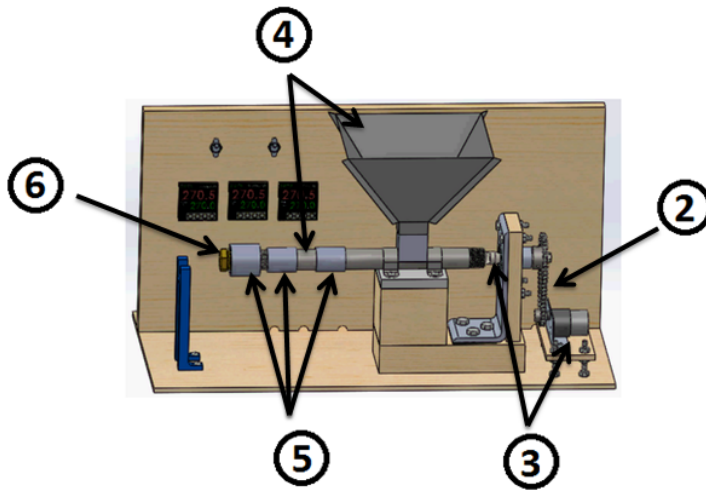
3D rendering of AkaBot machine. (Not pictured: electronics)
